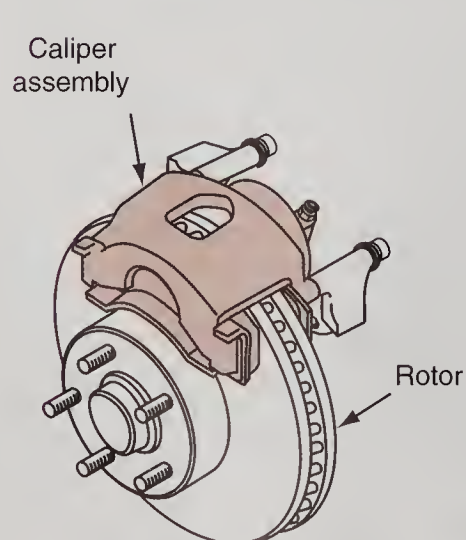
The brake caliper fits in a U-shape over the rotor.
